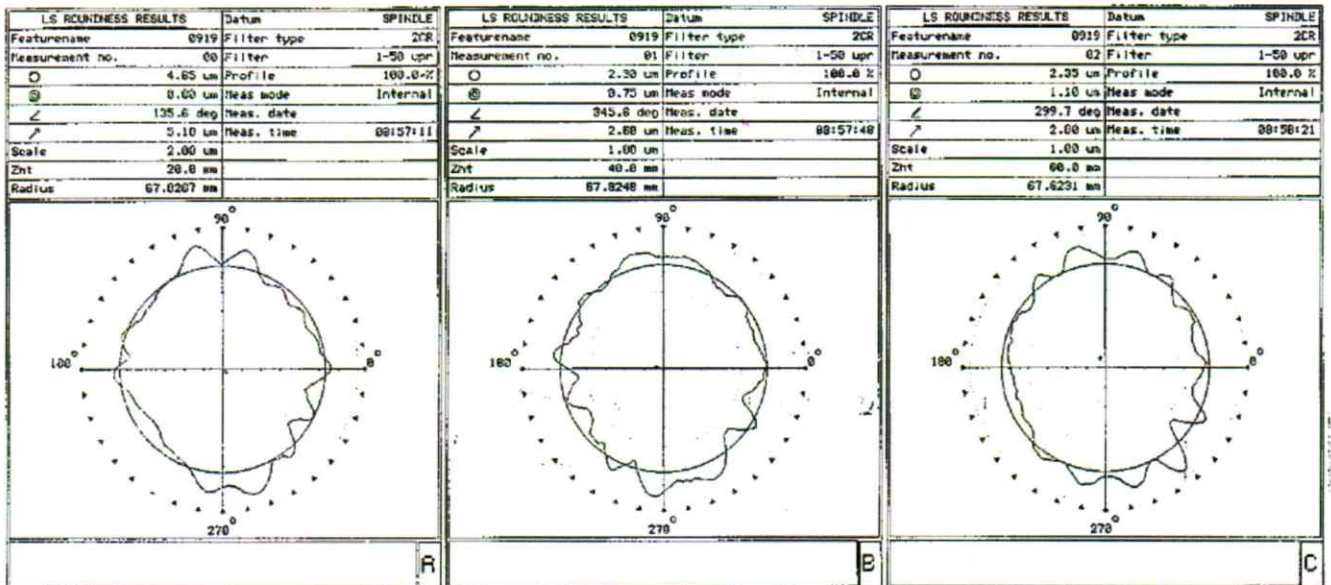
Measurement result of machining roundness of the workpiece
